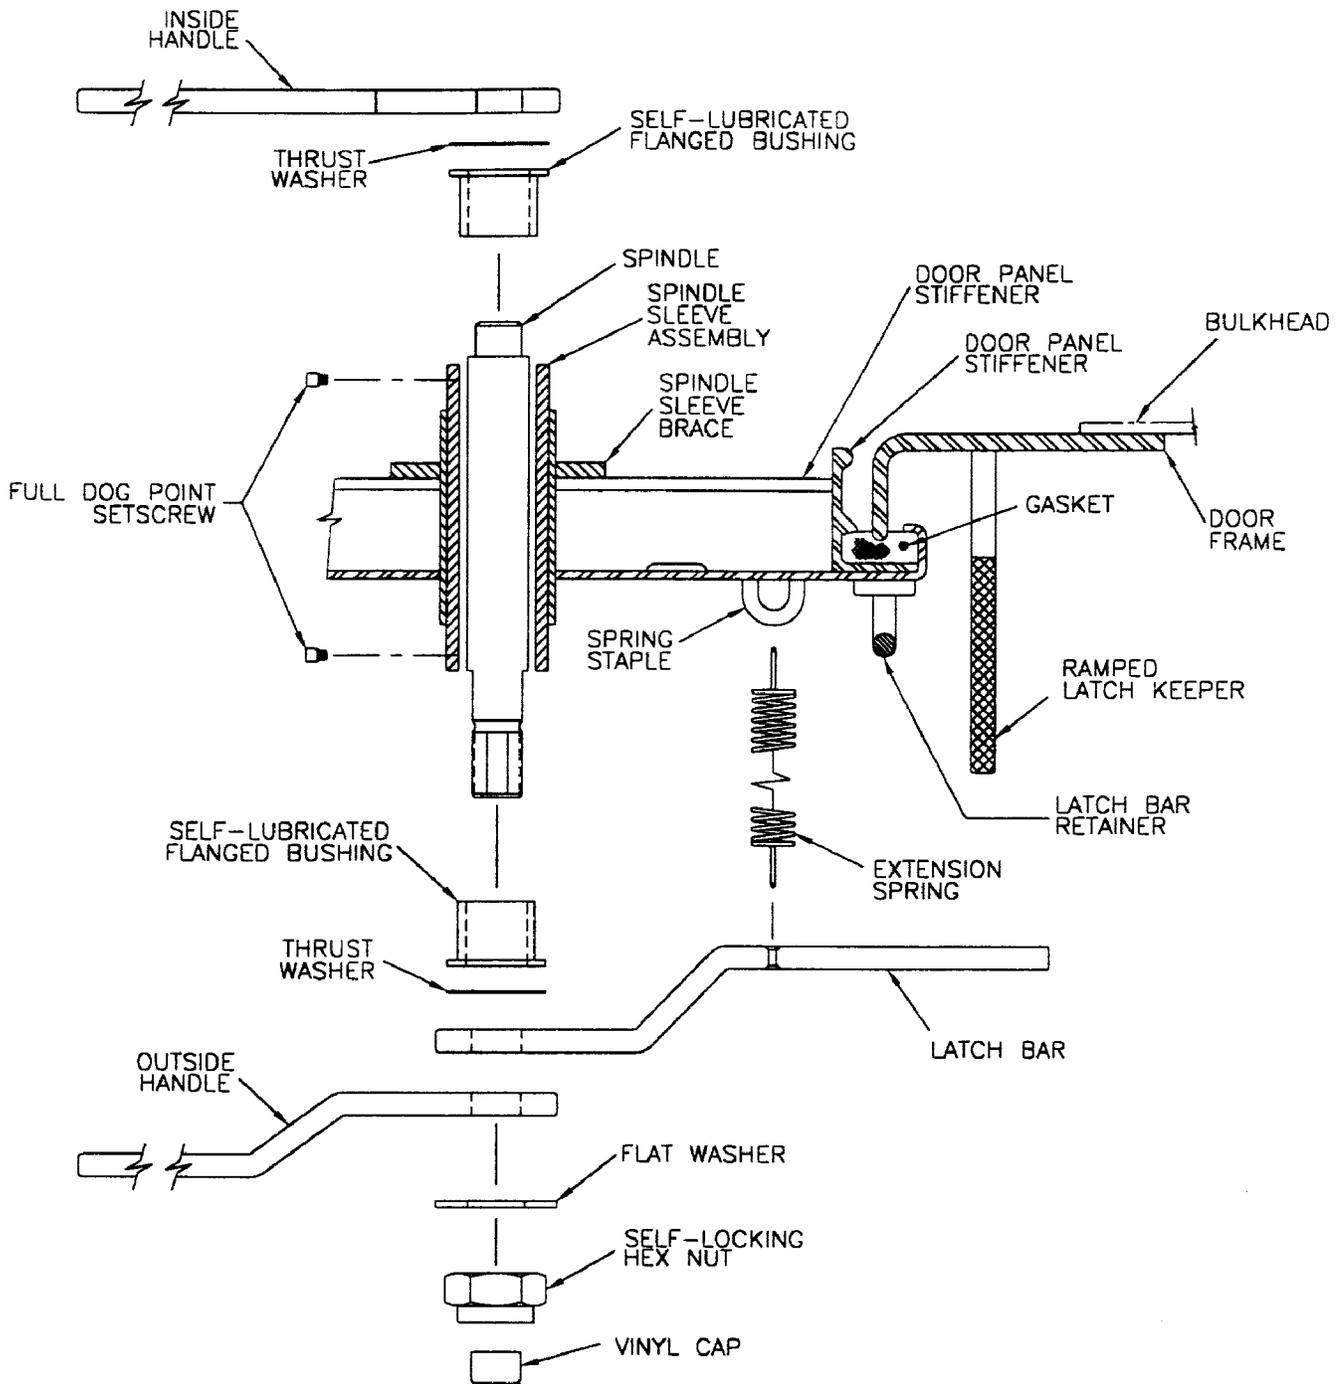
Dogging Assist Latch Installed by MACHALT 167-53009 (ECP-514)
